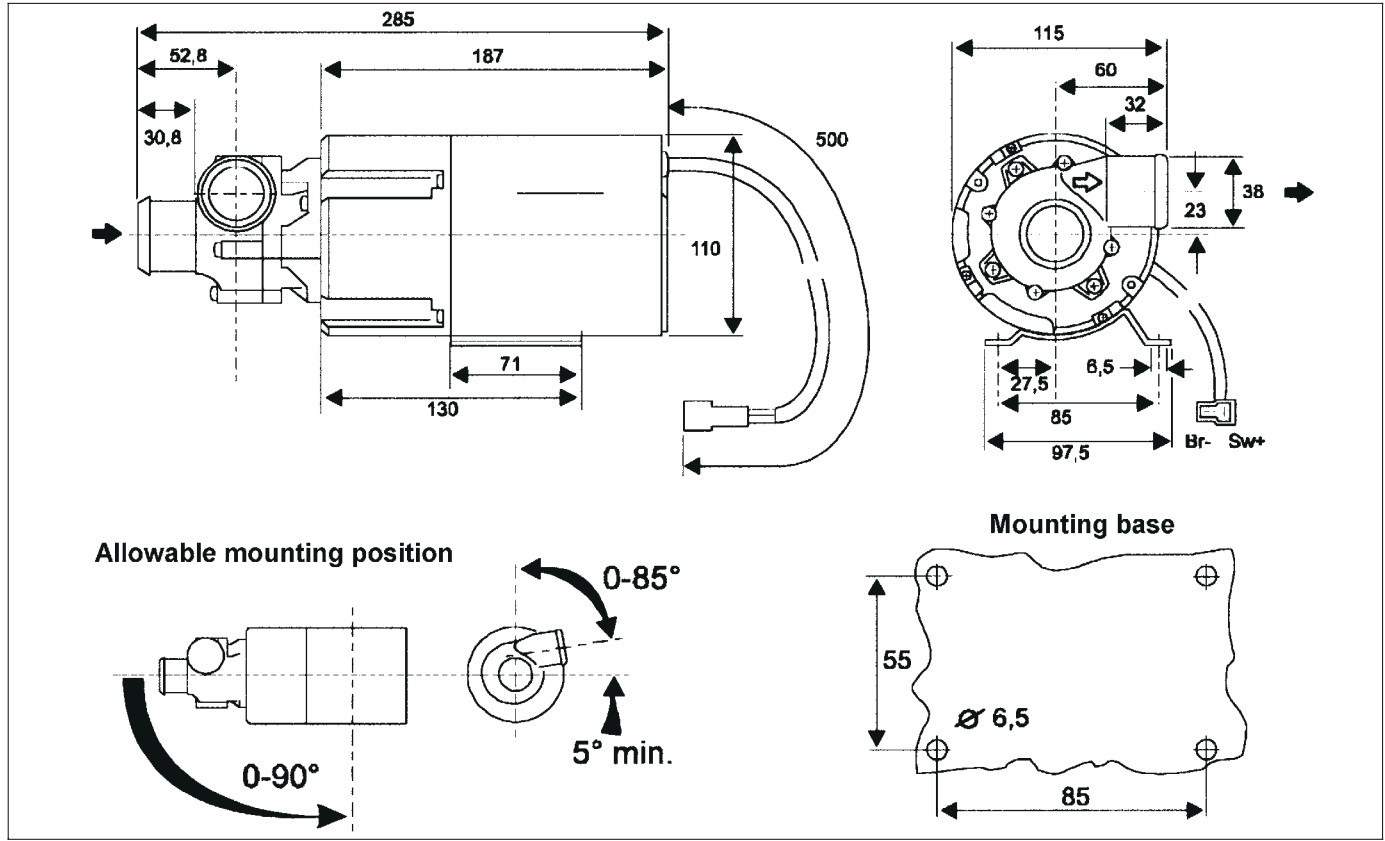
Coolant Circulating Pump Assembly - U 4851
